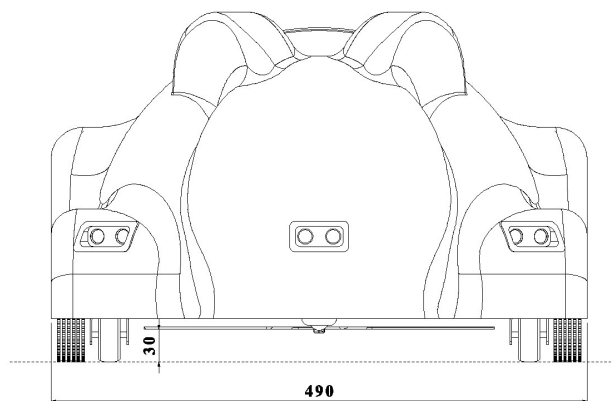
Main Dimensions of the Autonomous Lawn Mower (Front View)
